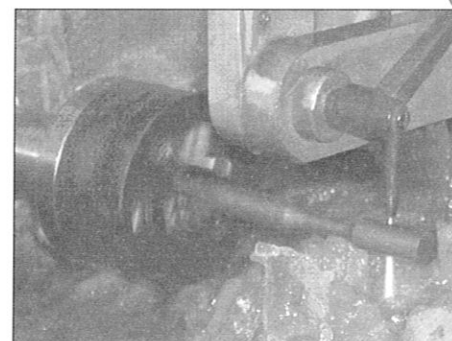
AWJ turning of a fatigue test specimen. Also pictured on the cover.
